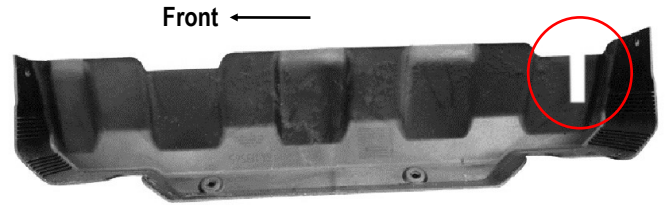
Passenger Side 2nd Bracket Location from Back of Body Panel
